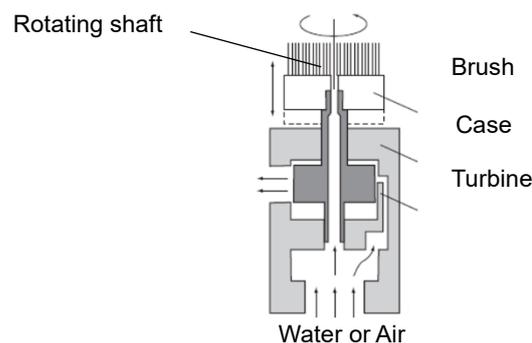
Bearing used for the rotating shaft sliding part of the sensor cleaning brush
